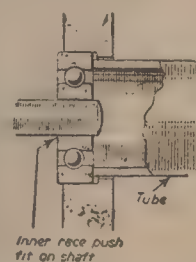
When driving ball-races into or out of their housing it is advisable to use a length of tubing as shown.
